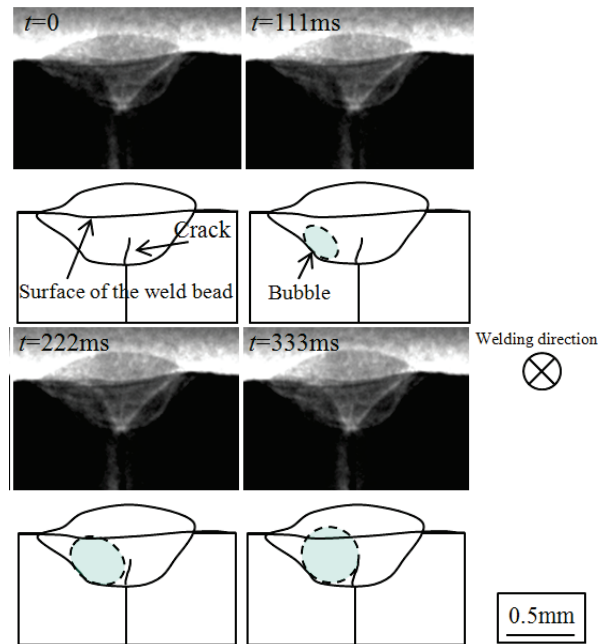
X-ray imaging during bead-on-plate welding. (Welding speed 1mm/s, laser power 200W)
